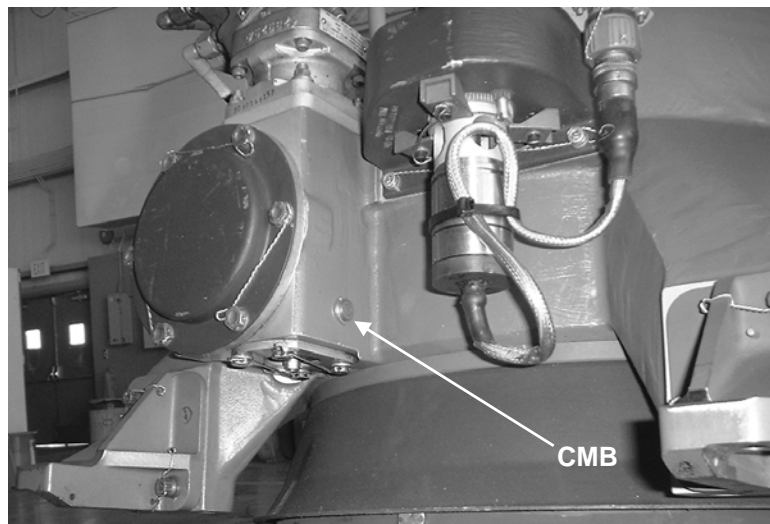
Azimuth Drive Assembly (AH-64A/D) with CMB Installed
